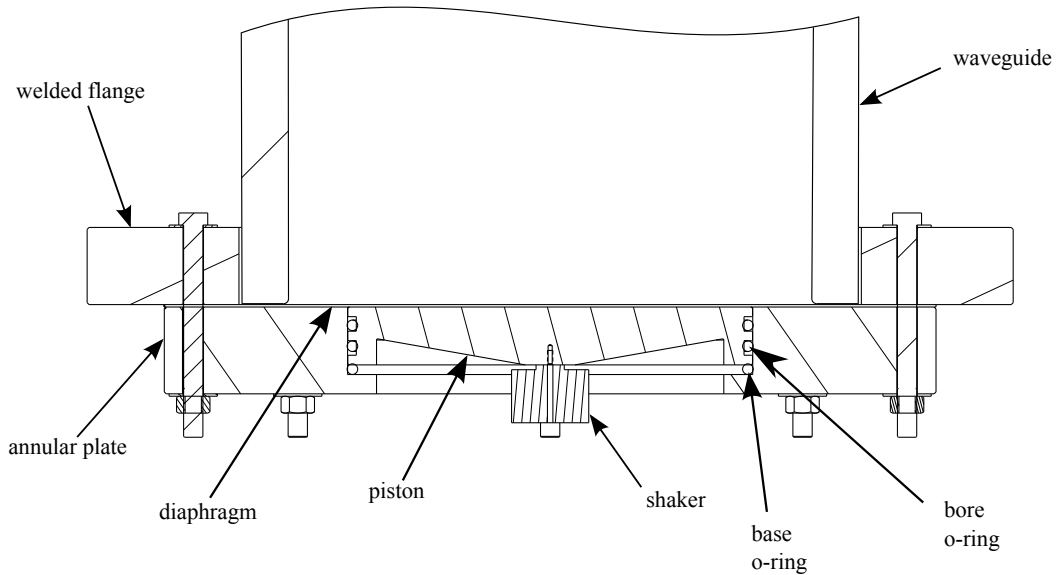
Cross-sectional view of the waveguide, piston, base and bore o-rings, annular plate, diaphragm, and shaker.
